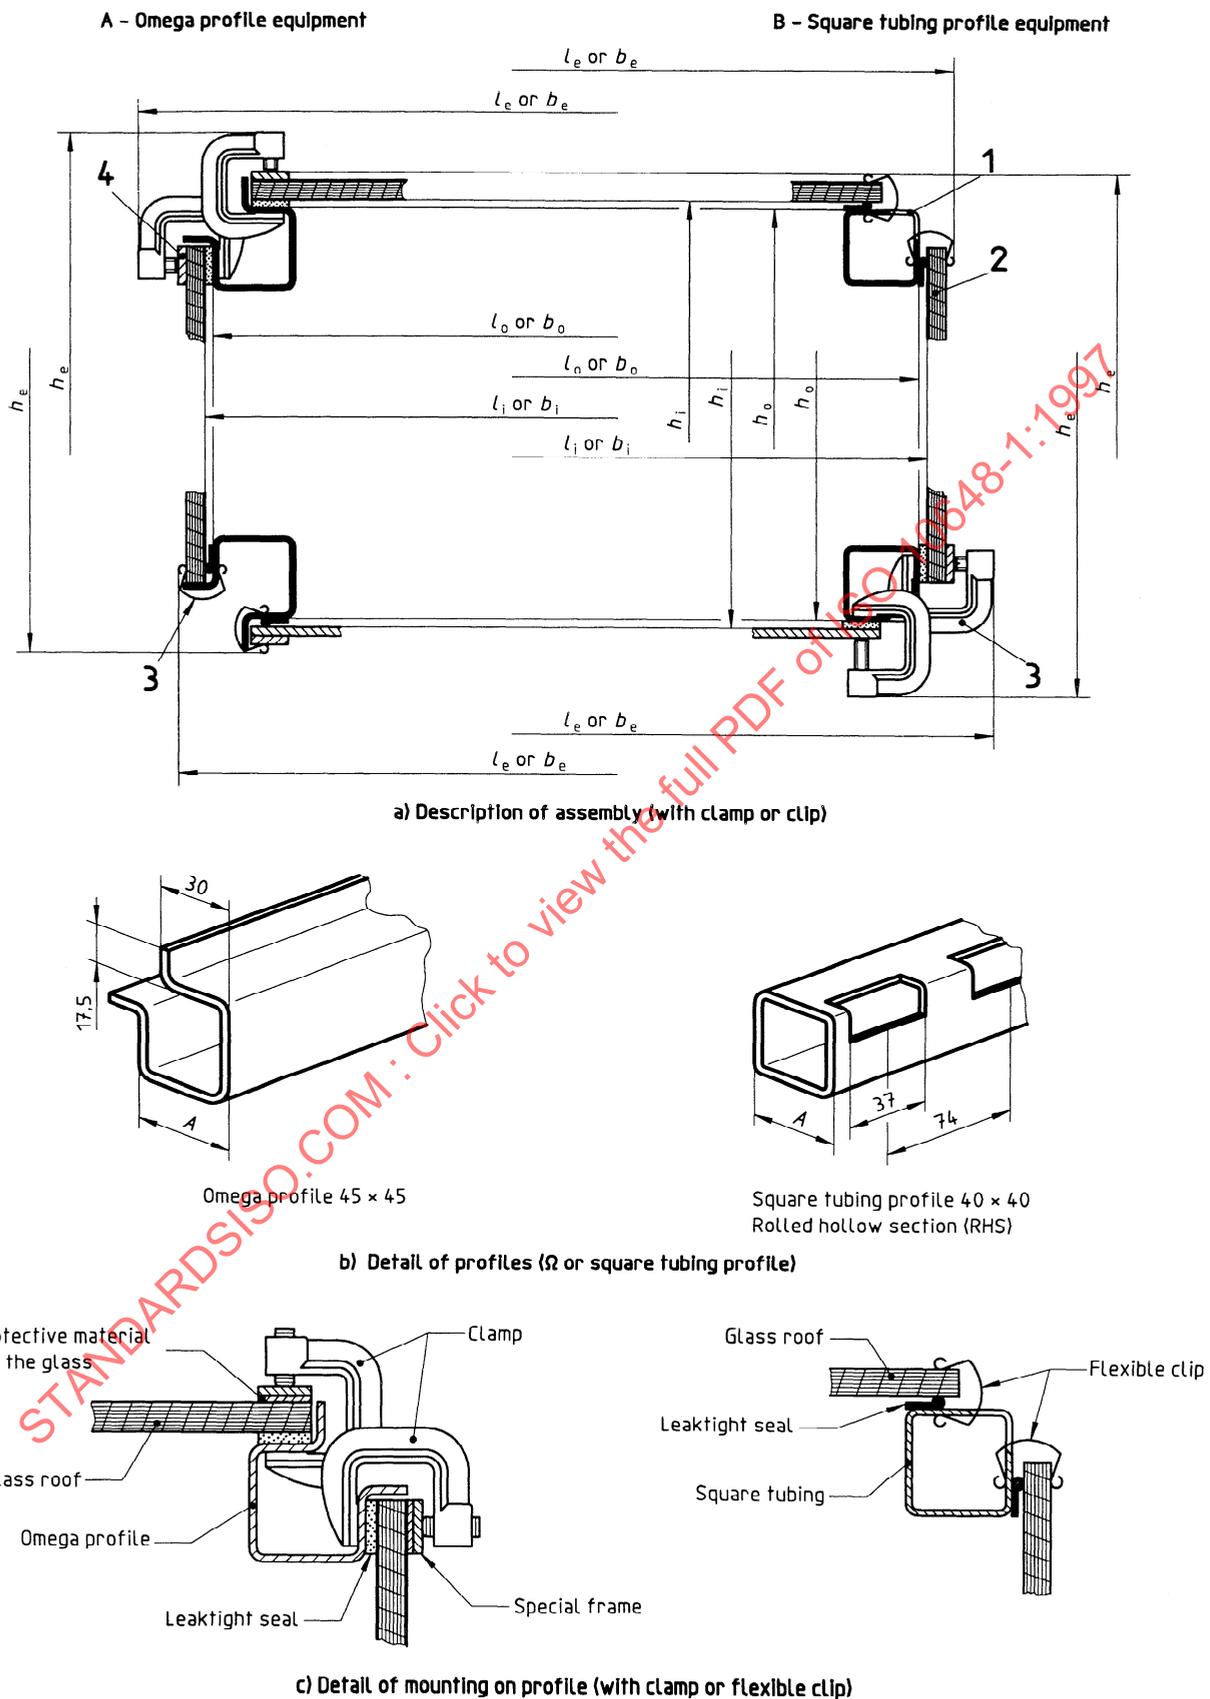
Principle of assembling and mounting of panels on metal-framed containment enclosures
